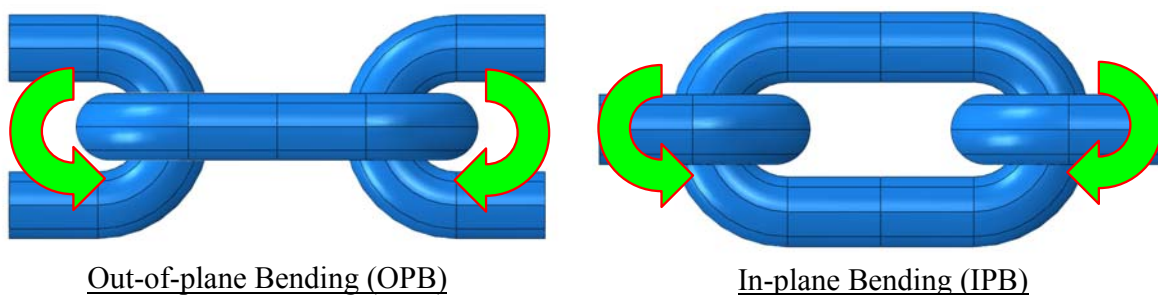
Out-of-plane bending (OPB) and In-plane bending (IPB) modes
